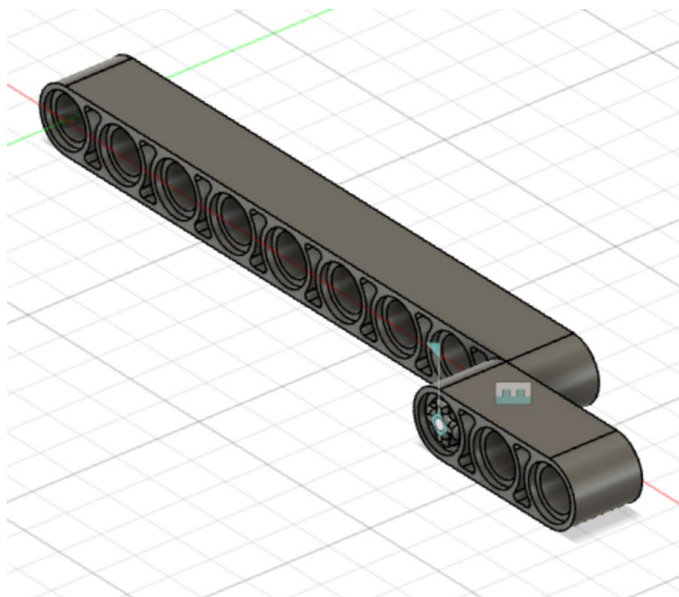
Two joints are made. Rigid joint: between pin and longer beam. Revolve joint: between pin and shorter beam.
